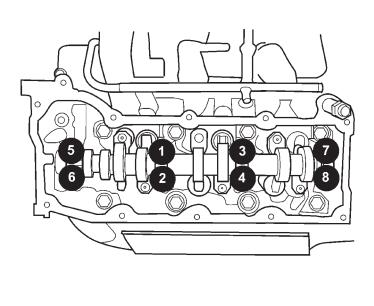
Camshaft Bearing Caps Tightening Sequence
